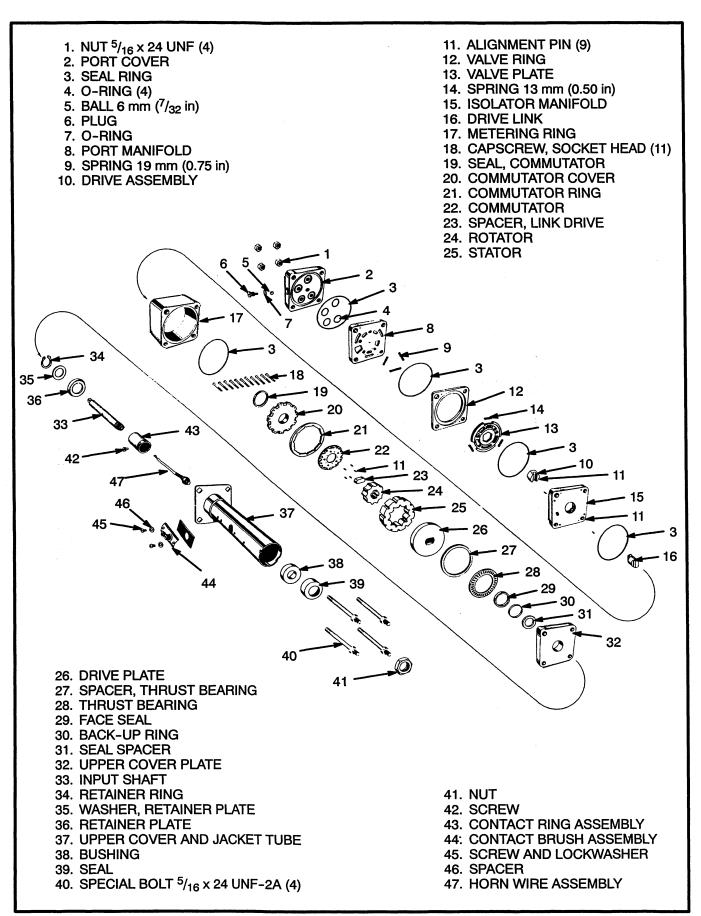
PARTS FOR THE STEERING CONTROL UNIT
